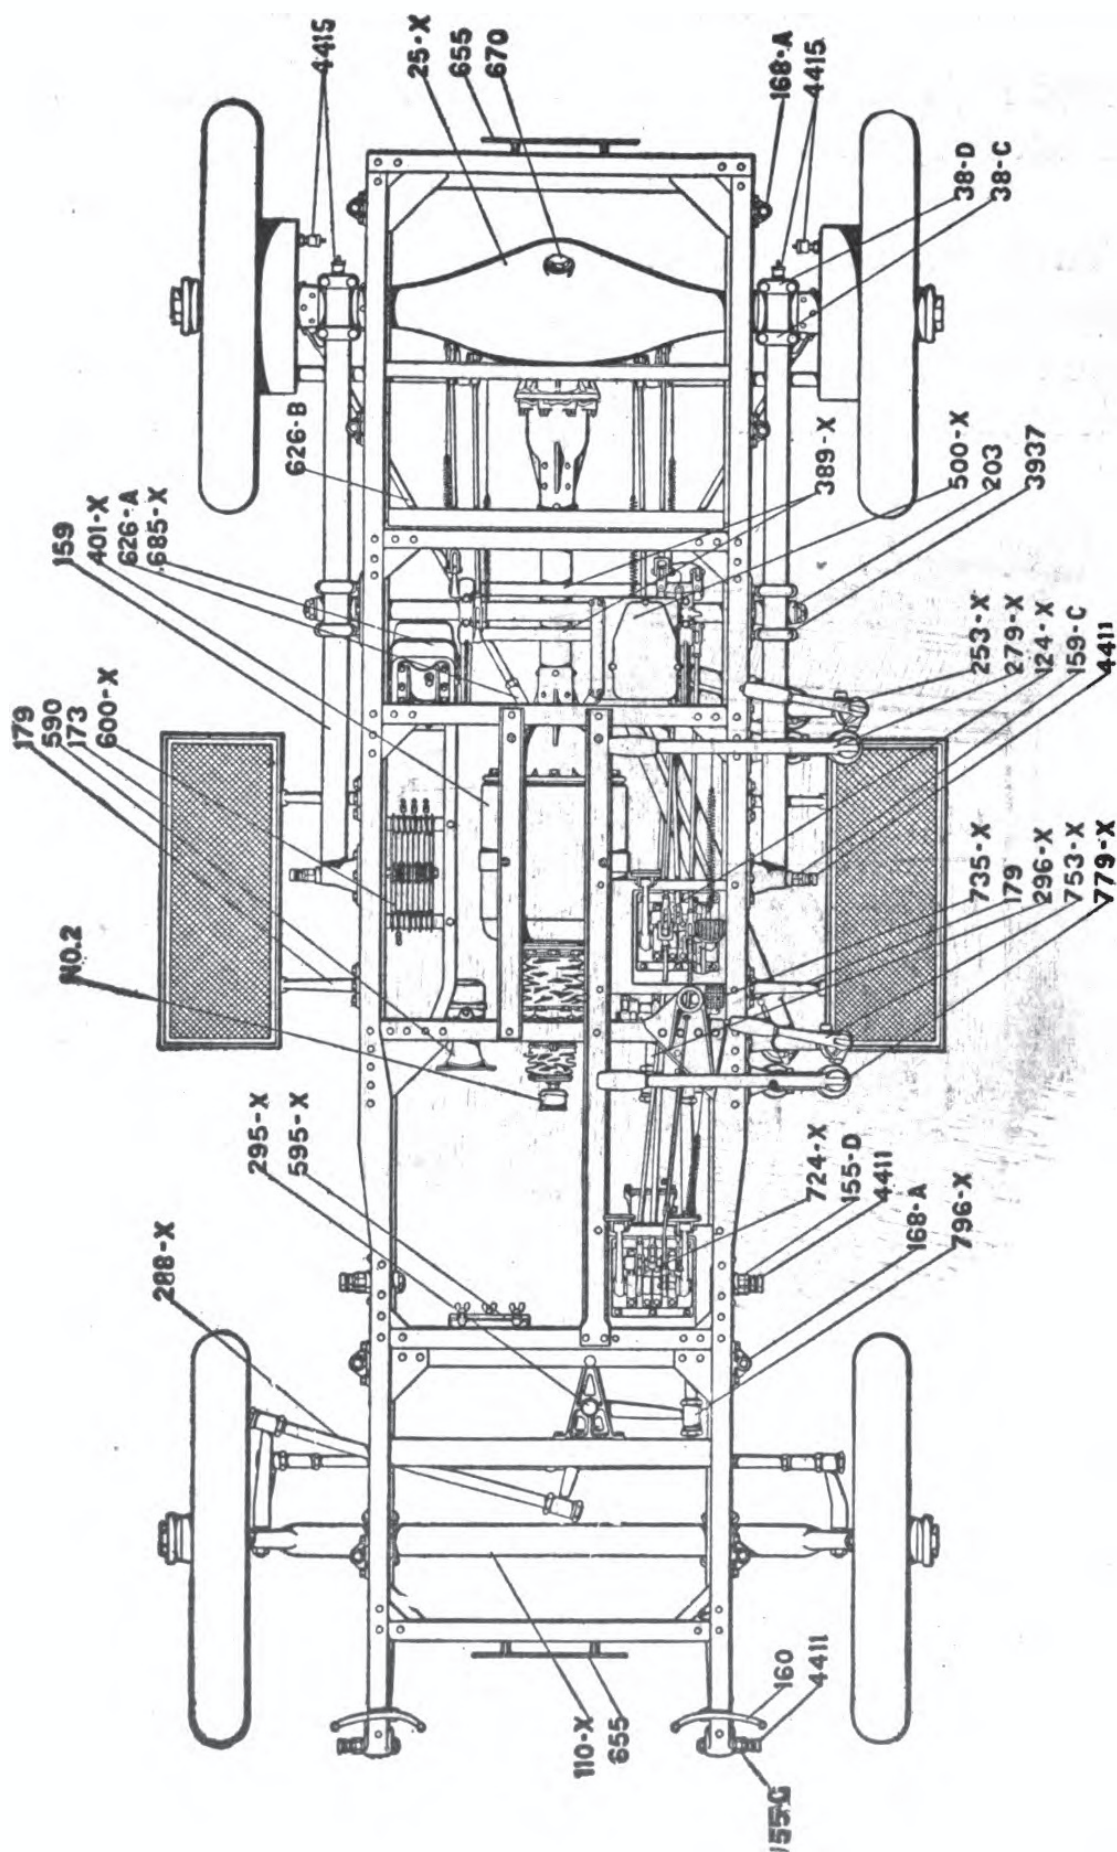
,060.—Plan view of Baker electric chassis. The parts are: 25-X, rear axle; 38-C, rear spring yoke front; 38-D, rear spring yoke rear; 110-X, front axle; 124-X, front levers, rear; 155-C, front spring bolt, front; 155-D, front spring bolt, rear; 159, rear spring; 159-C, rear spring bracket; 160, head lamp bracket; 168, A, fender bracket; 173, step pad; 179, step bracket; 203, rear spring seat, center; 253-X, rear control mast; 279-X, steering mast, rear; 288-X, lower steering rod, bell crank to spindle; 295-X, bell crank; 296-X, lower steering rod, mast to mast; 389-X, brake shaft; 401-X, motor; 500-X, controller; 590, horn; 595-X, fuse box; 600-X, resistance; 626-A, brace rod clevis; 626-B, brace rod; 655, license bracket; 670, oil inlet; 685-X, contactor; 724-X, foot levers, front; 735-X, interlock; 753-X, front control mast; 779-X, steering mast, front; 796-X, lower steering rod, mast to bell crank; 3,937, rear spring clip; 4,411, 4,415, No. 2 grease cups.
